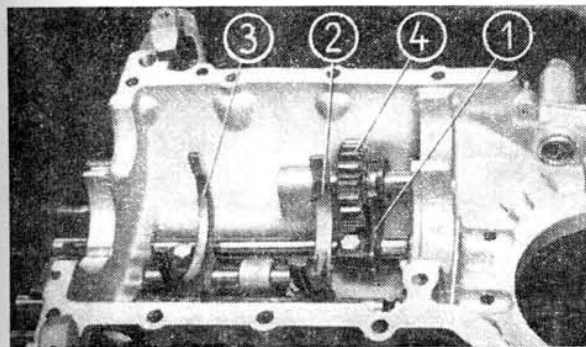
/4 - Gear Change Mechanism and Reverse-speed Gear
